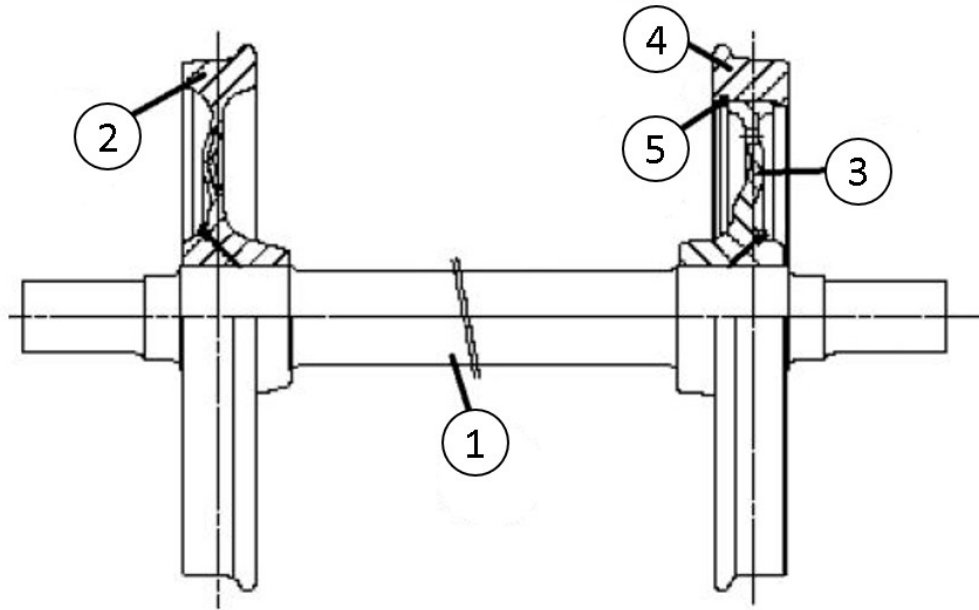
Principle components of a wheelset [12]. 1) Axle 2) Monobloc wheel 3) Wheel centre 4) Tyre 5) Retaining ring
